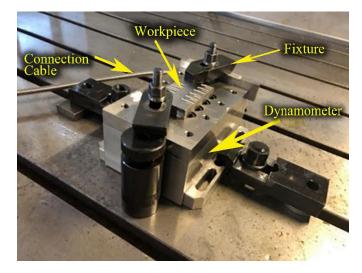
Placement of the workpieces on the Kistler dynamometer
